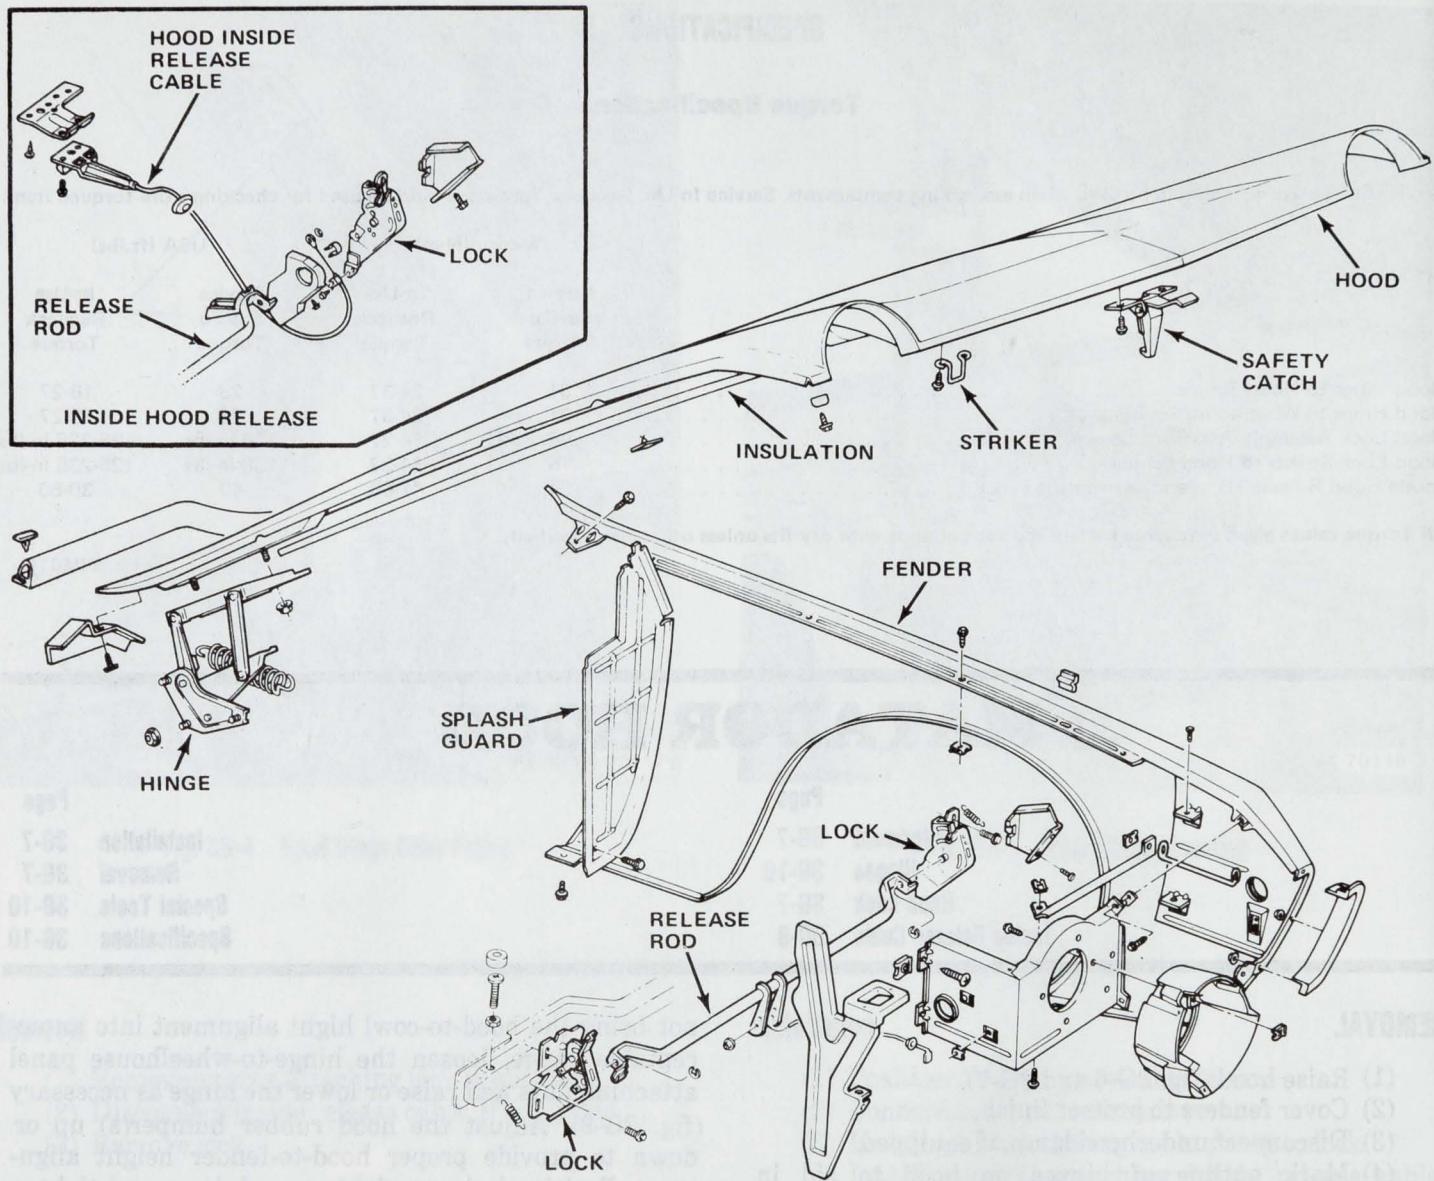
G-6 Front Fender and Hood Components—Matador Coupe
